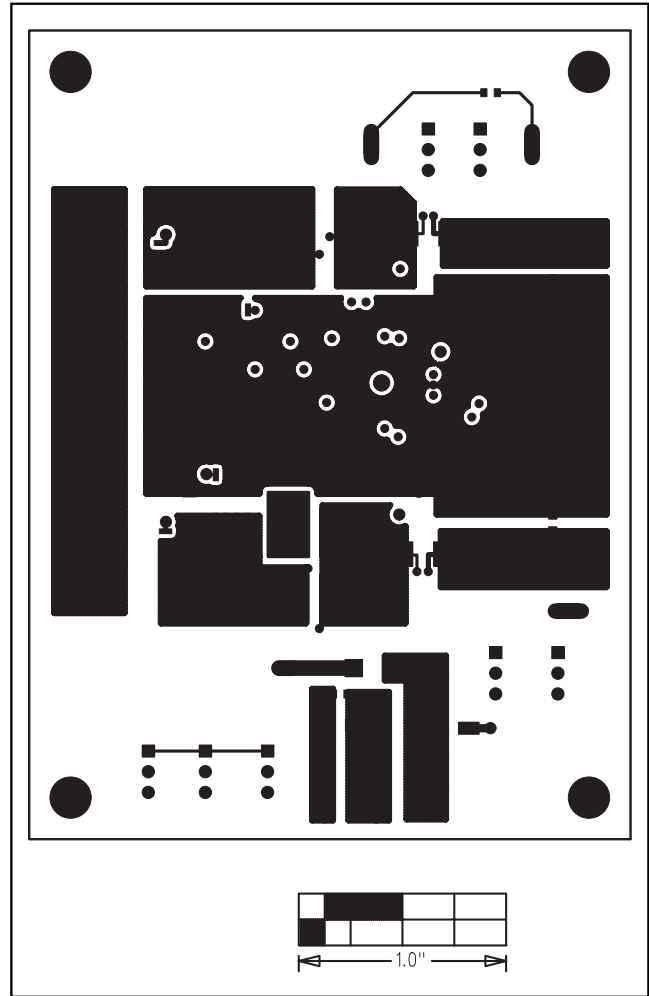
MAX1537 EV Kit PC Board Layout—Component Side
